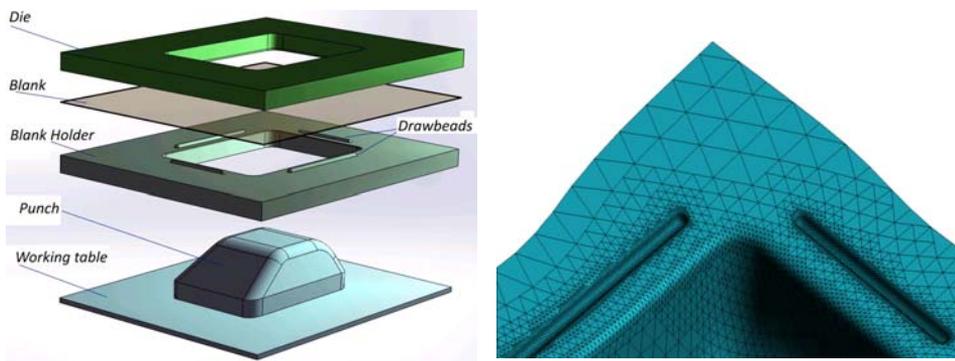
CAD model of tool parts Figure 2.2 The refined mesh in drawbead region
